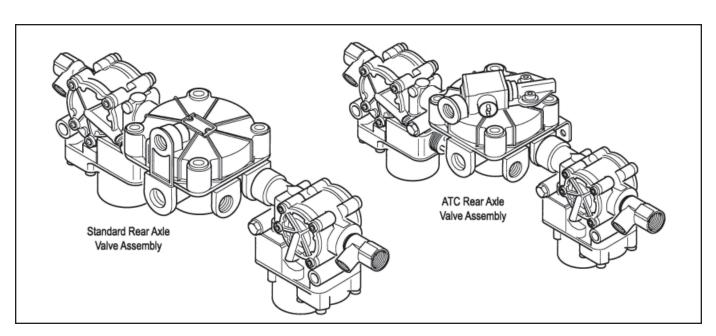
Rear Axle Valve Assemblies - Standard and ATC Version Shown
